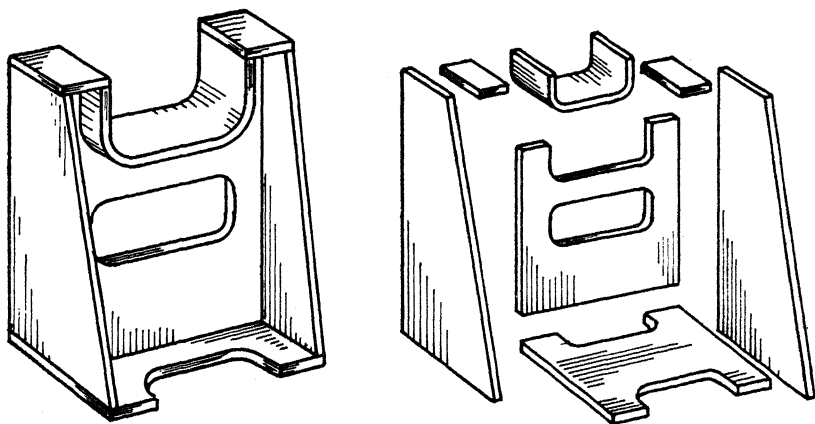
A bearing support of simple construction comprising flame cut and shear cut plate assuring good appearance, light weight and low cost.
